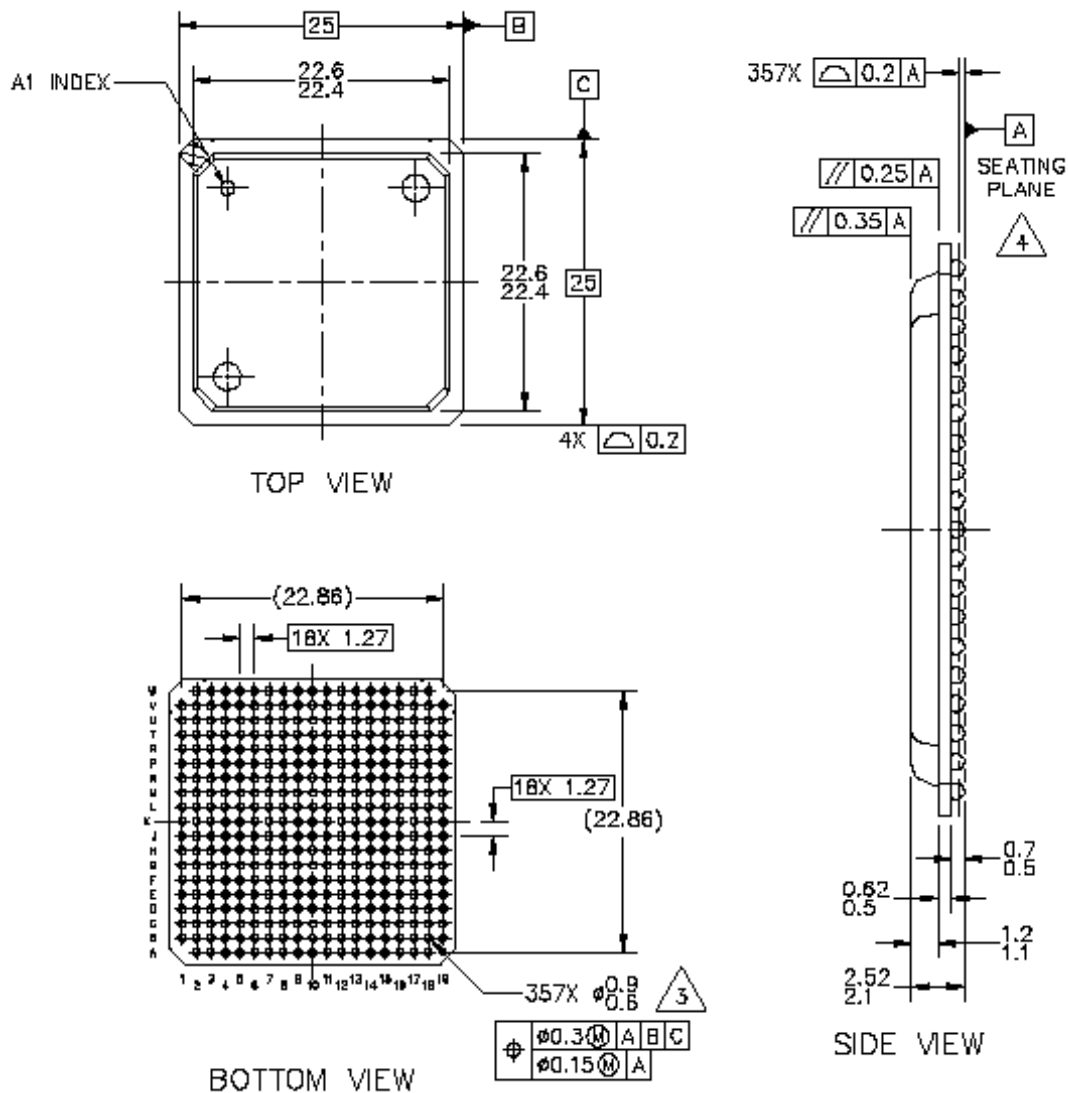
Mechanical Dimensions and Bottom Surface Nomenclature of the ZQ PBGA Package
